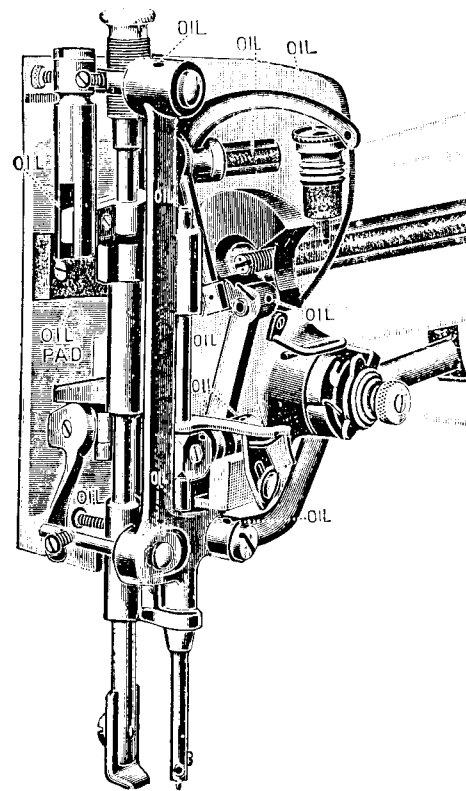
Transparent End View of Machine, Showing Oiling Points
